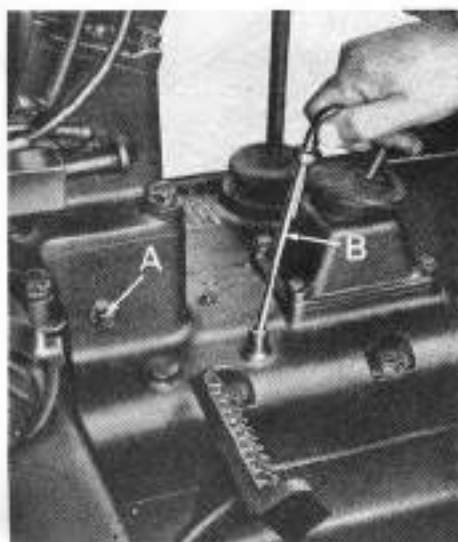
On model 1200, remove drain plug (A) and drain oil from steering gear before removing assembly from transmission cover. Transmission oil level dipstick is (B).
